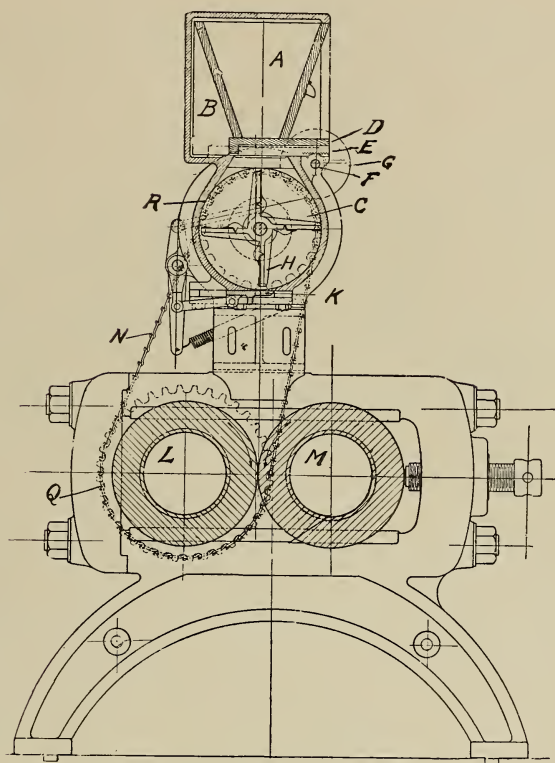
THE PEARCE MECHANICAL MIXER AND FEEDER.
